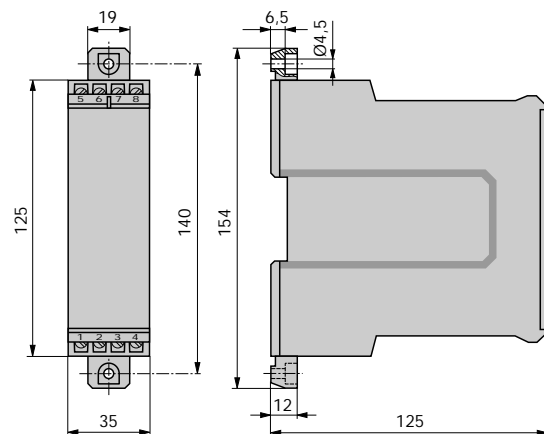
Transducer with the screw hole brackets pulled out for wall mounting.
